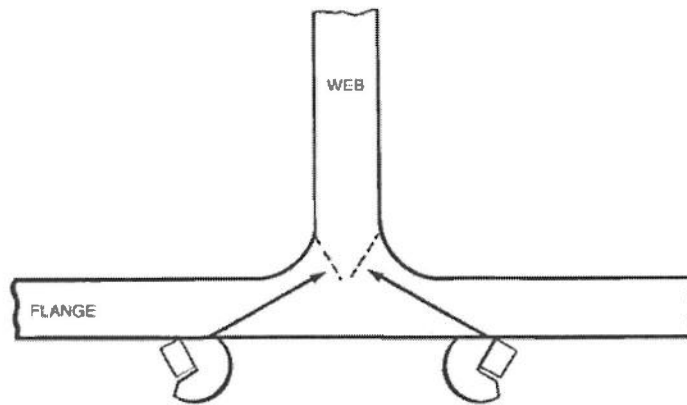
Technique 6, for Inspecting the Fusion Zone of T-Welds
